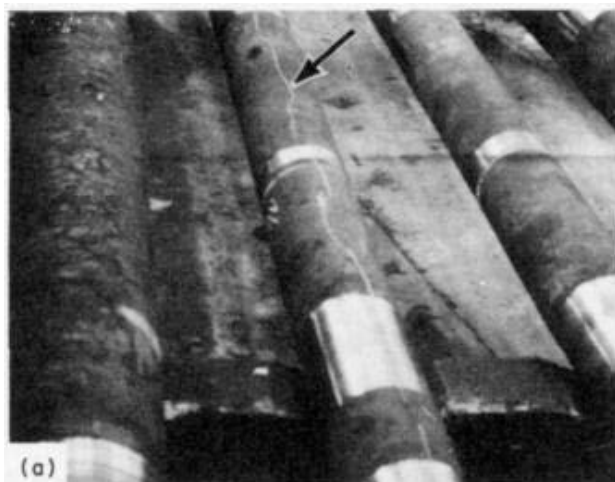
3.7m long through wall crack in pressure vessel.
